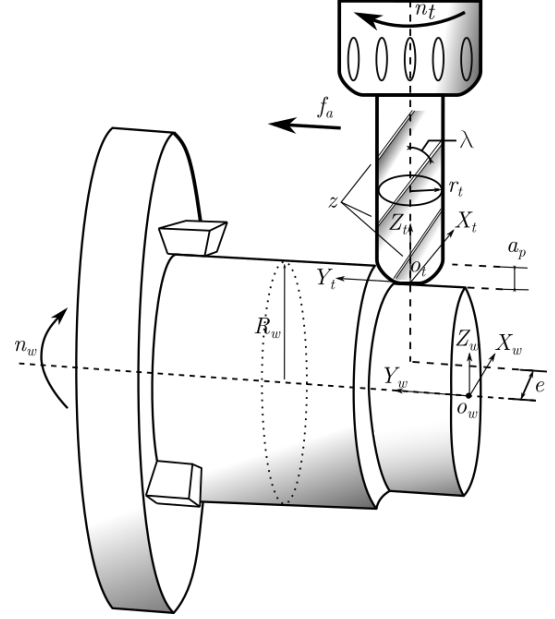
Orthogonal turn-milling kinematics. R_w Workpiece radius, n_w Workpiece rotational speed [rpm], r_t Tool radius [mm], n_t Tool rotational speed [rpm], f_a Axial feed [mm/Workpiece rev], a_p Depth of cut [mm], z Number of cutting edges, e Eccentricity [mm], λ Helix angle [°], O_t Tool origin, X_t Tool x direction, Y_t Tool y direction, Z_t Tool z direction, O_w Workpiece origin, X_w Workpiece x direction, Y_w Workpiece y direction, Z_w Workpiece z direction.
